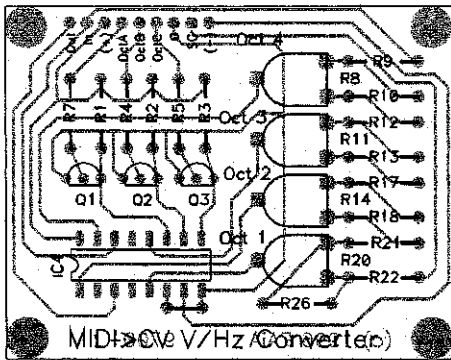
Detailing parts placement and phantom view of conductors of the V/Hz Adapter circuit board.
